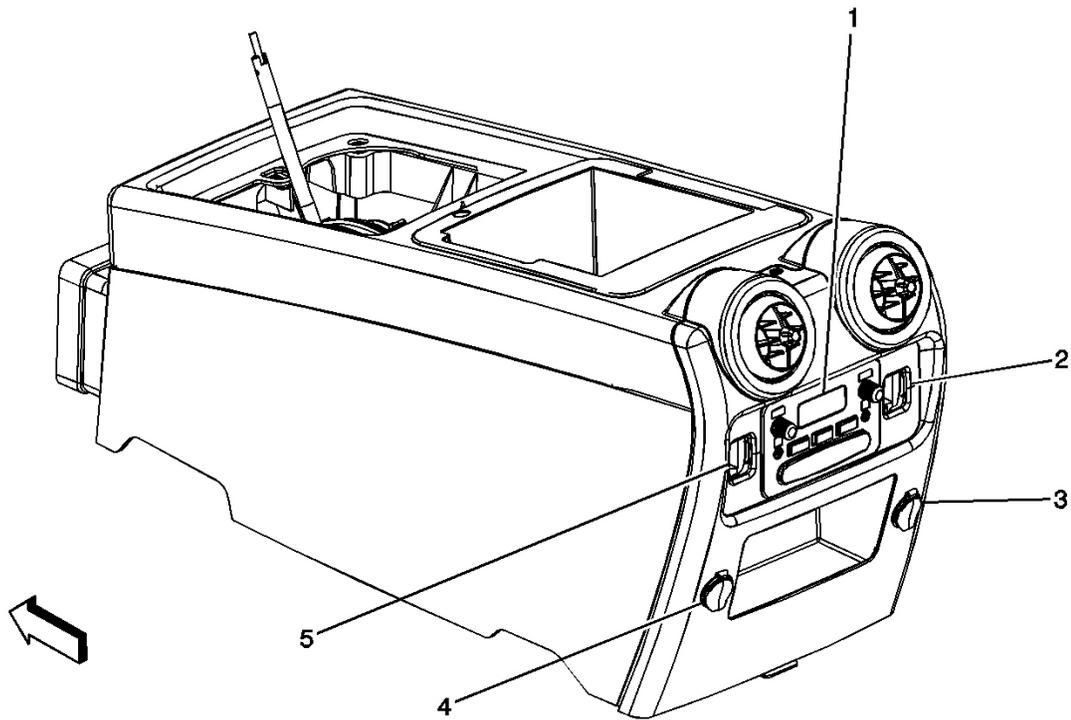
Accessory Power Outlets - Rear Console Component Views
